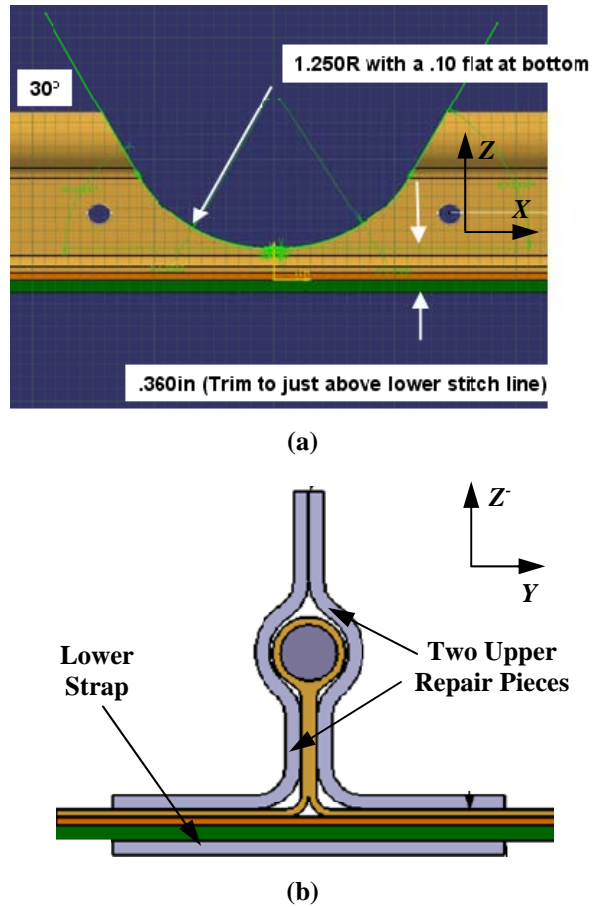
Single-stringer PRSEUS panel (a) simulated rod and web damage, (b) repair assembly cross-section.
